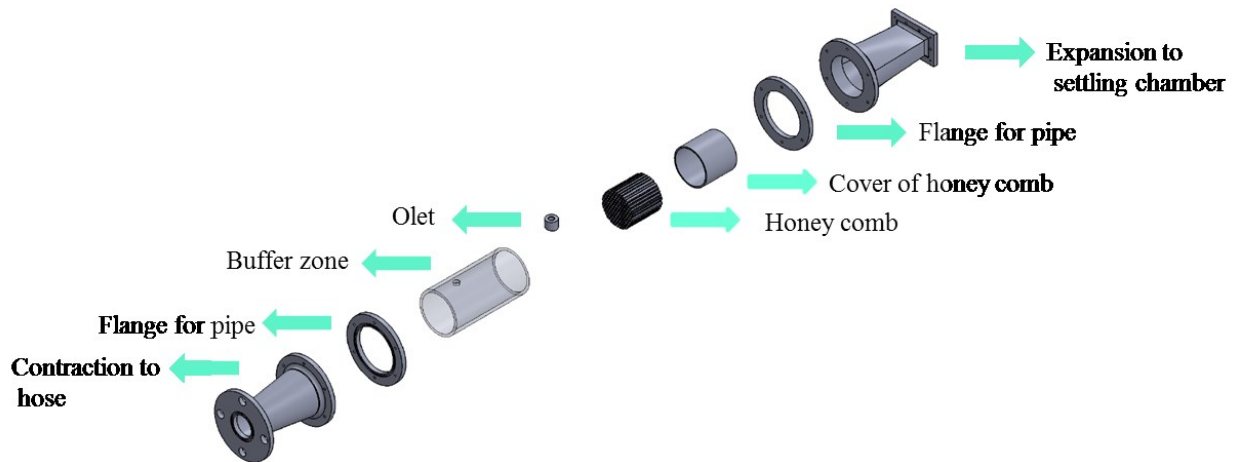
The 3D exploded view of settling chambers with expansion to settling chamber and contraction to hose.
